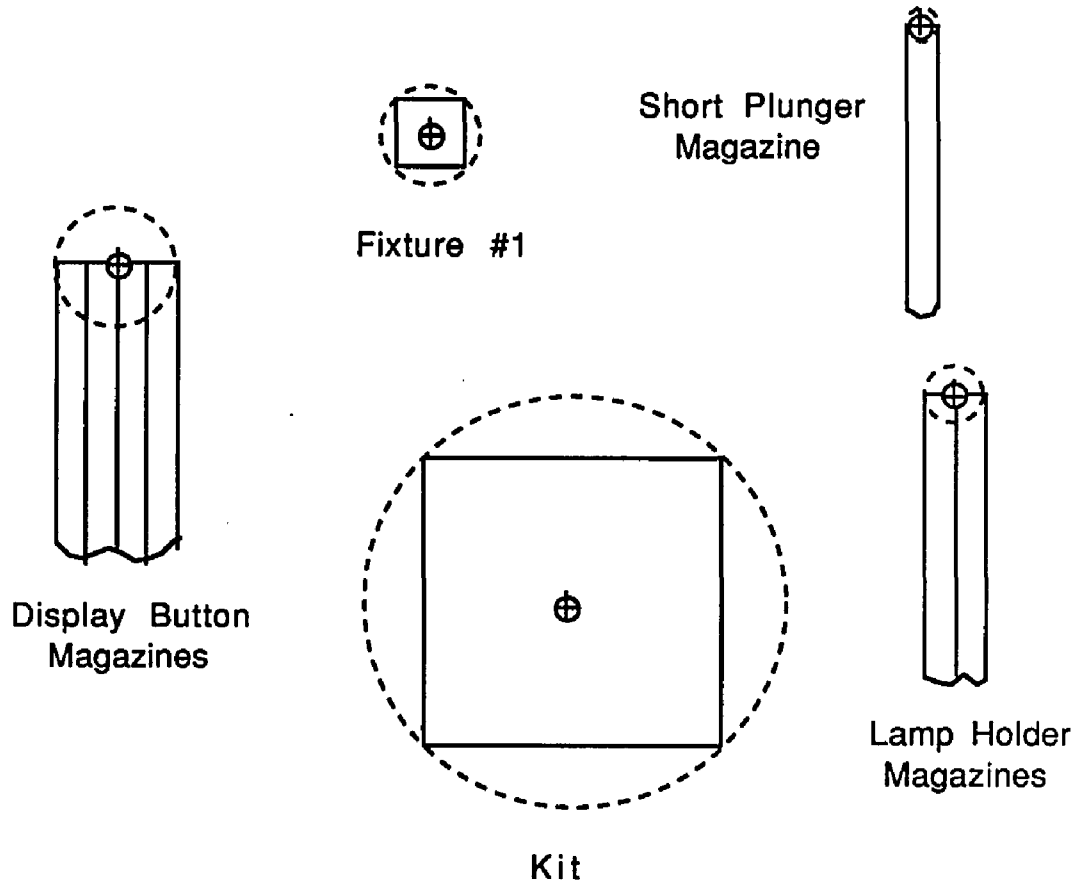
Footprints for Several Devices in the Control Panel Assembly Problem
